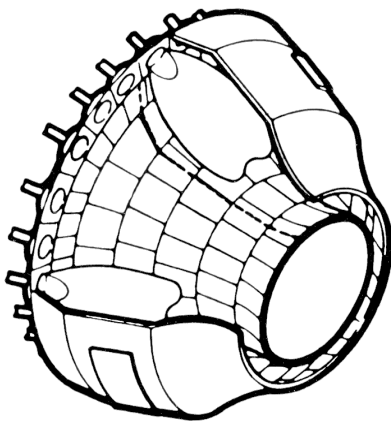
Vx4.3A Hybrid Burner Ring® (HBR) Combustor - One Annular Combustor with 24 Burners.
